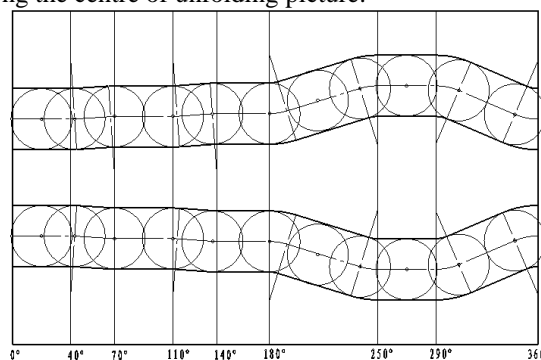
Expanded view along conductor rail of cylindrical cam
